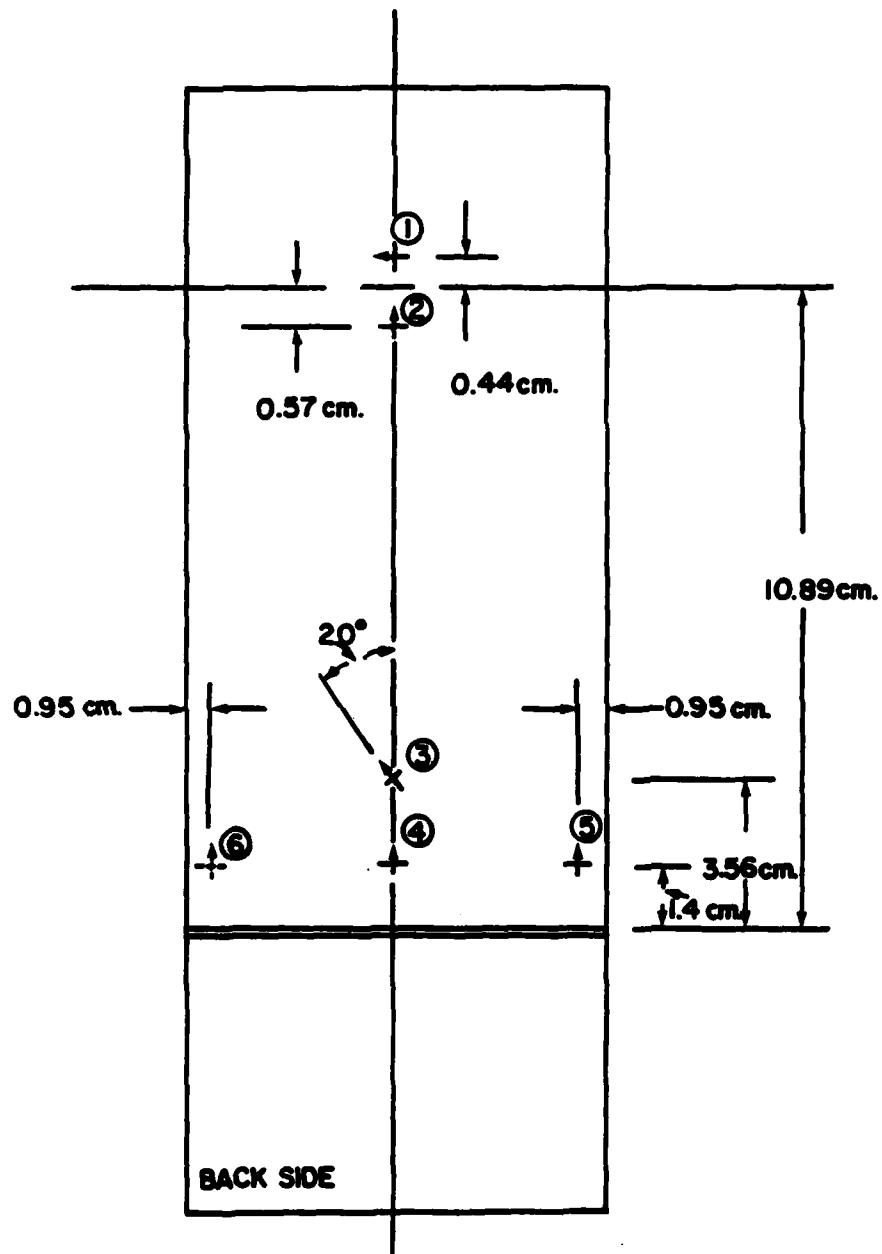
A. Strain Gage Locations for Group 4 Structural Element Test Specimens.
